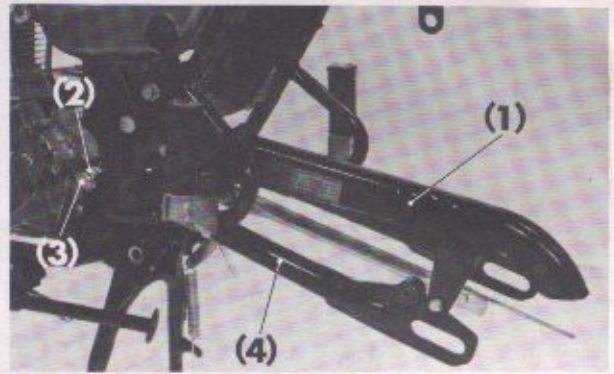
(1) Drive chain case (3) Pivot bolt
